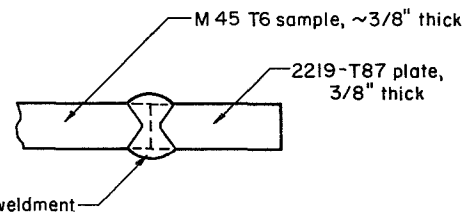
Weld joint assembly of M-45 casting alloy and 2219 plate made using automatic GTA procedure and 2319 filler wire (ref. 12).
